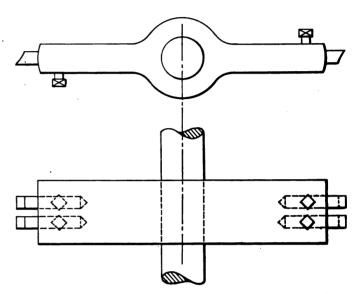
Non-Adjustable Boring Bar Head for Truing Up Piston Valve Bushings
